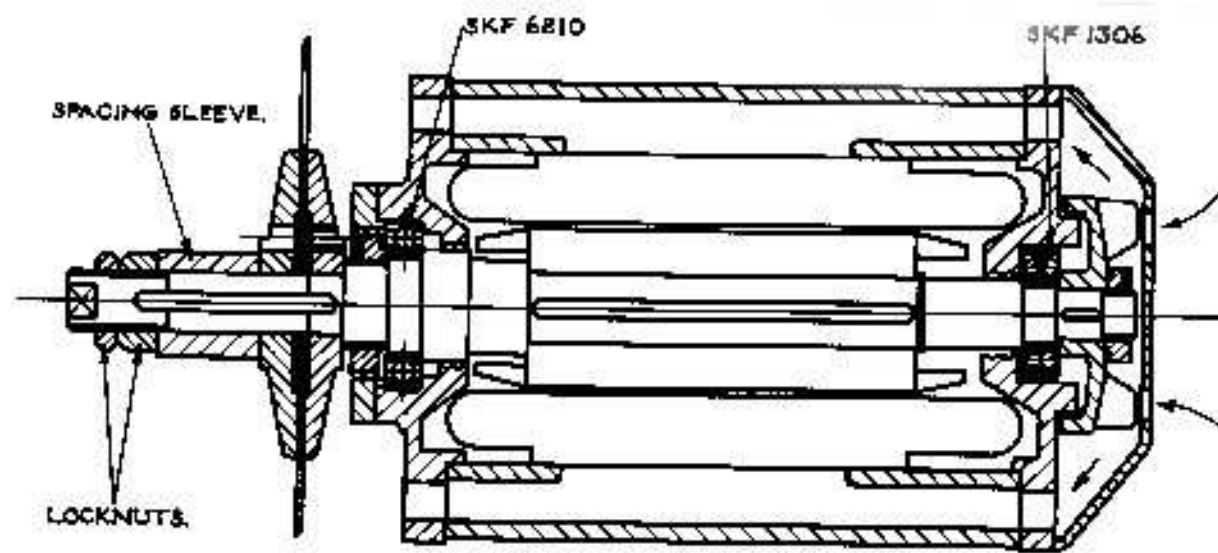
DIAGRAM SHOWING CARRIAGE ROLLER MOUNTING.
